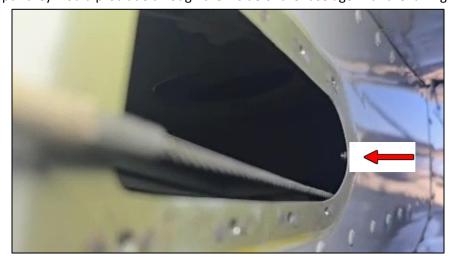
Removed Fairing with Reinstalled Screw for Clearance Inspection
